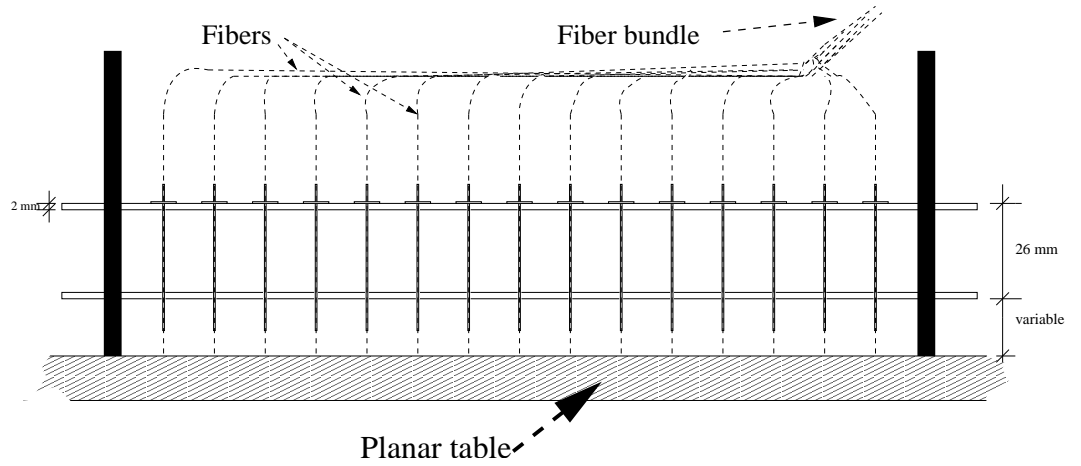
Mechanical structure used to mount the fiber supports, fiber mounting and fiber aluminisation.
